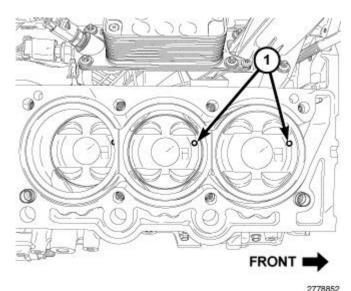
Piston Installation Position Courtesy of CHRYSLER GROUP, LLC
